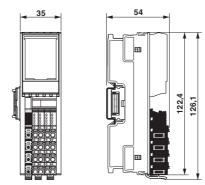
Nominal dimensions of the H housing with one terminal field (type 1H, e.g., AXL F DI16/1 HS 1H, AXL F UTH4 1H, AXL F RS UNI 1H)
